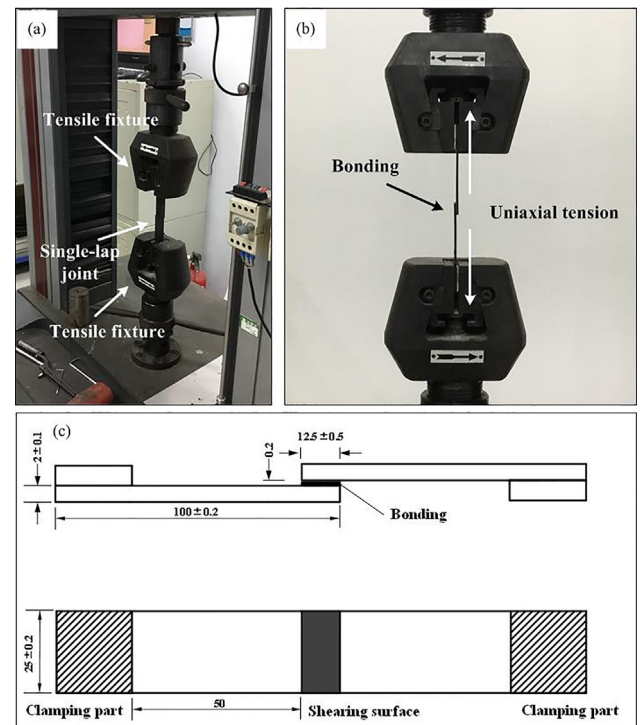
(a) The equipment of uniaxial tensile test; (b) uniaxial tensile test of sing-lap specimen; (c) schematic diagram of single-lap specimen structure.
